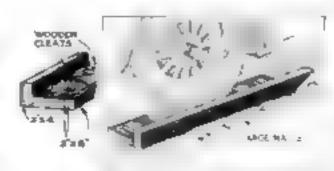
A cleated and spiked board, with a guide rim along our edge, will belp in getting your automobile out of mudboles
